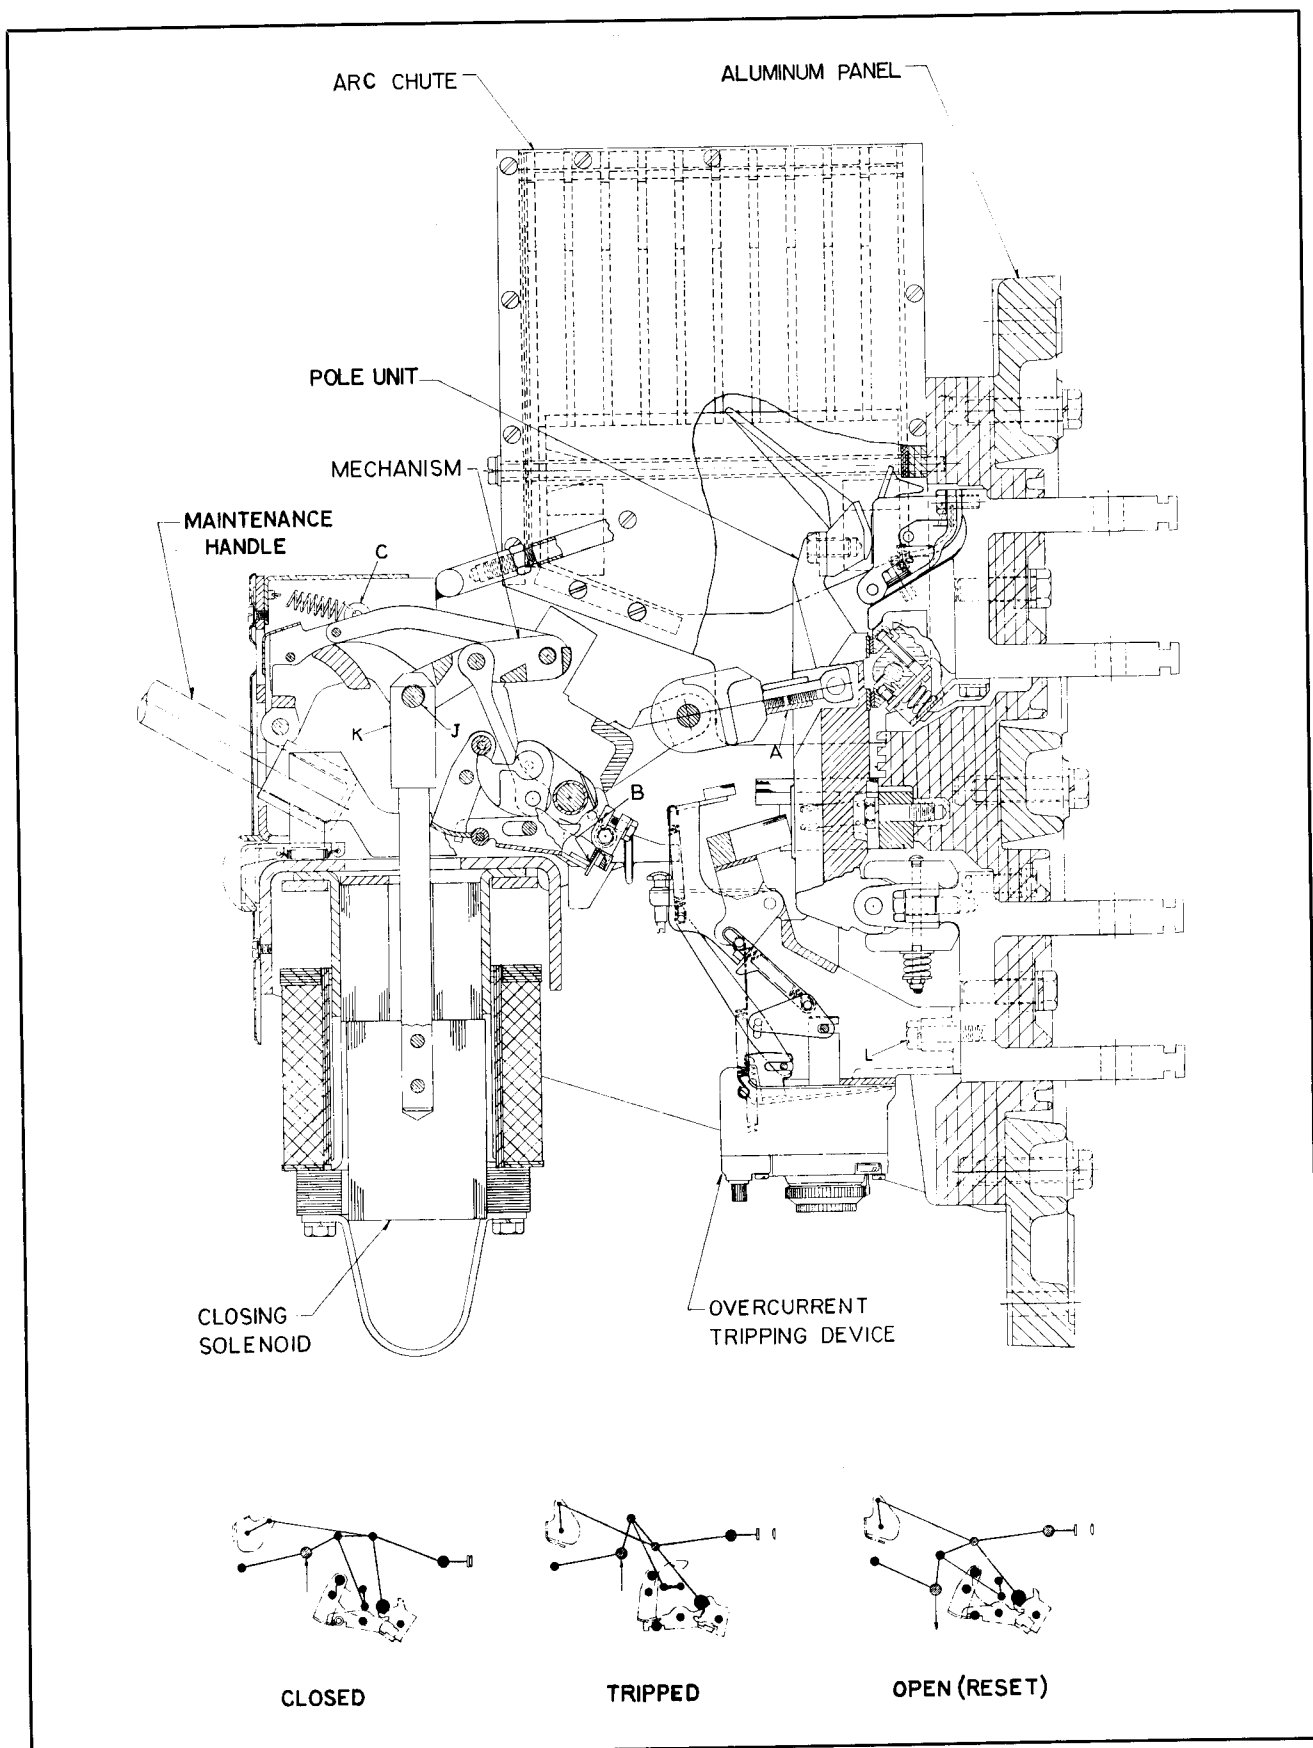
Cross-Sectional View of Air Circuit Breaker
